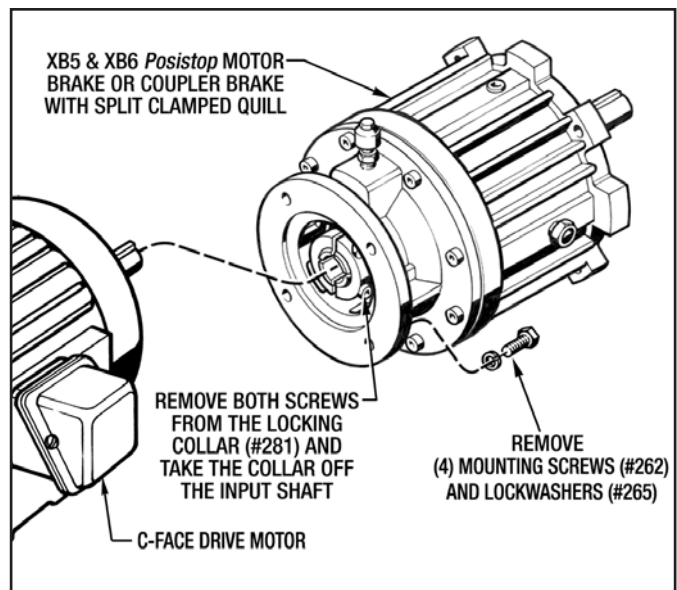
Removing XB5 & XB6 Coupler or Motor Brake From The Drive Motor
